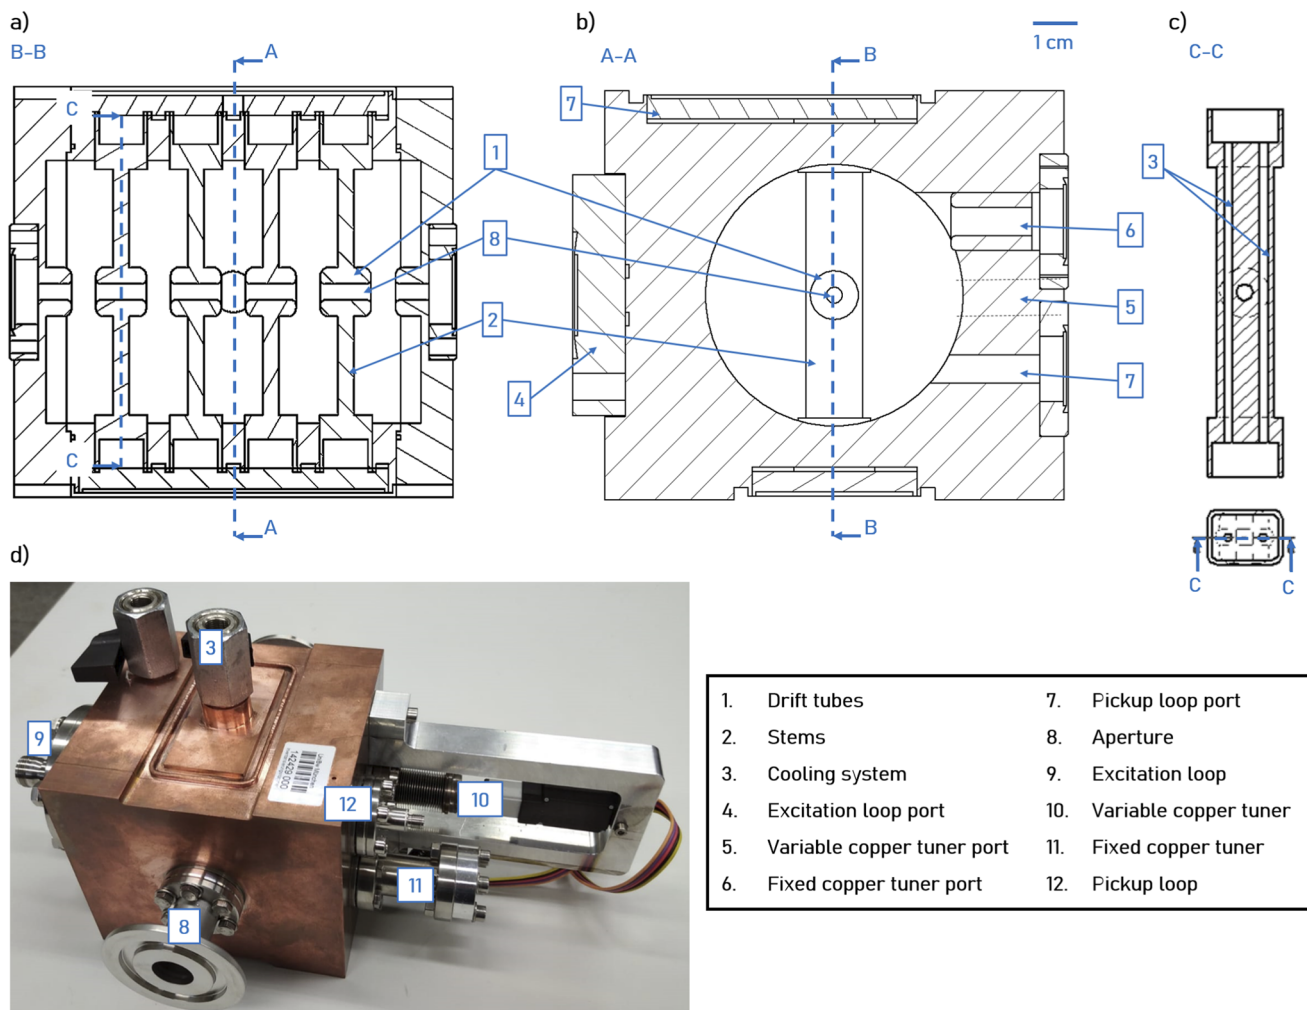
(a) Longitudinal and (b) transversal sections of the traditionally manufactured reference DTL cavity. (c) Section of stem and drift tube with integrated cooling channels. (d) Fully assembled 3 GHz buncher unit.
